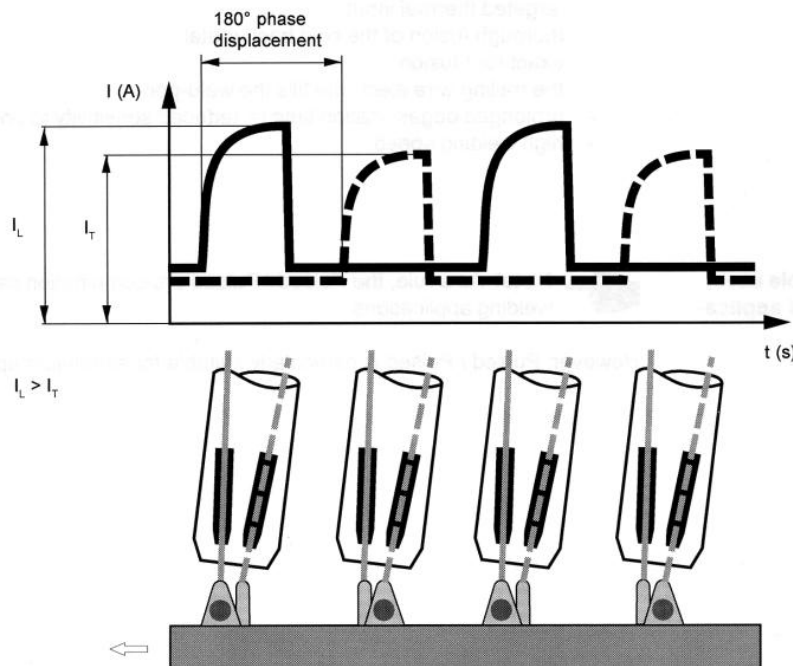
Tandem Pulse welding schematic (reproduced from Fronius operators manual)
